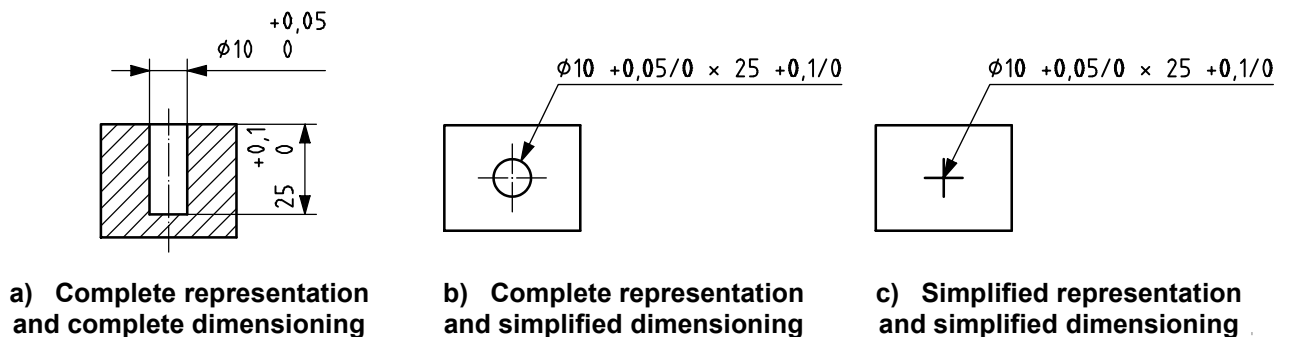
Hole with tolerance indication (hole bottom not specified)
